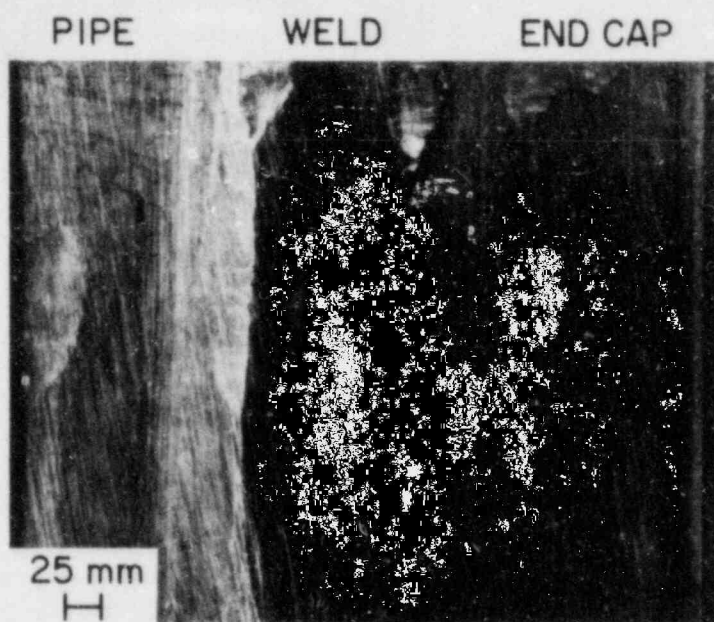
Inner Surface of End Cap Weld Crown and HAZ. Showing Postweld Grinding Marks.
